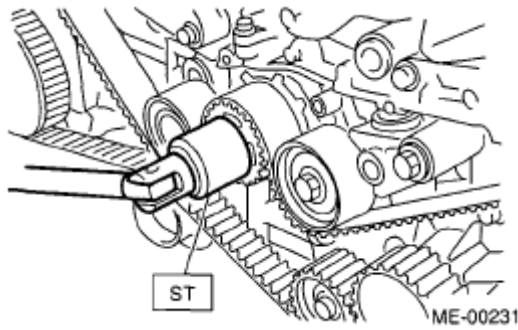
Turning Crankshaft Using Crankshaft Socket
